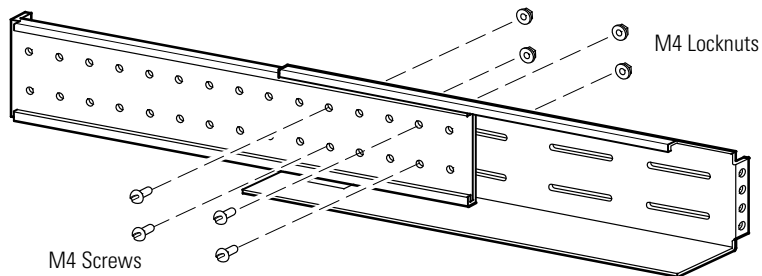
Tightening the Rail Adjustment (Right Rail Assembly Shown)
